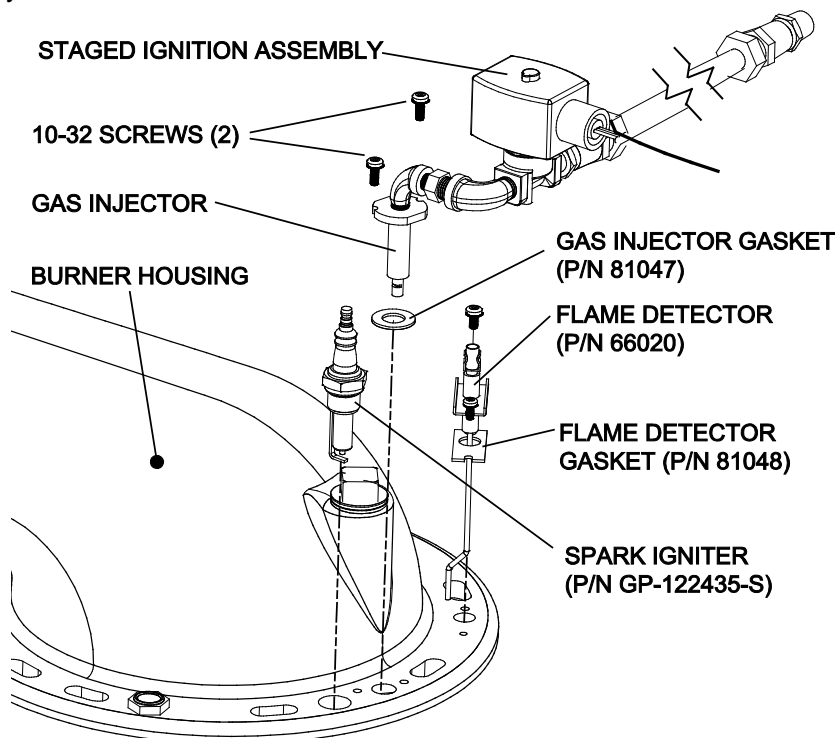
Partial Exploded View Showing Flame Detector, Spark Igniter, Gas Injector, and Staged Ignition Assembly on the Burner Housing Flange
